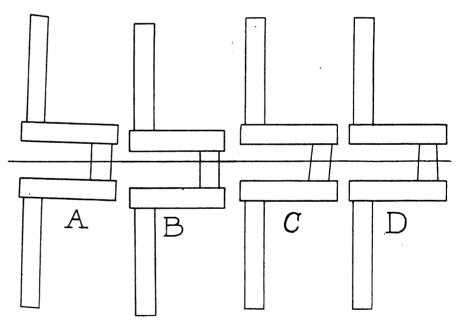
FAULTS SOMETIMES FOUND IN CRANK SHAFTS. (Exaggerated in the drawing.)
